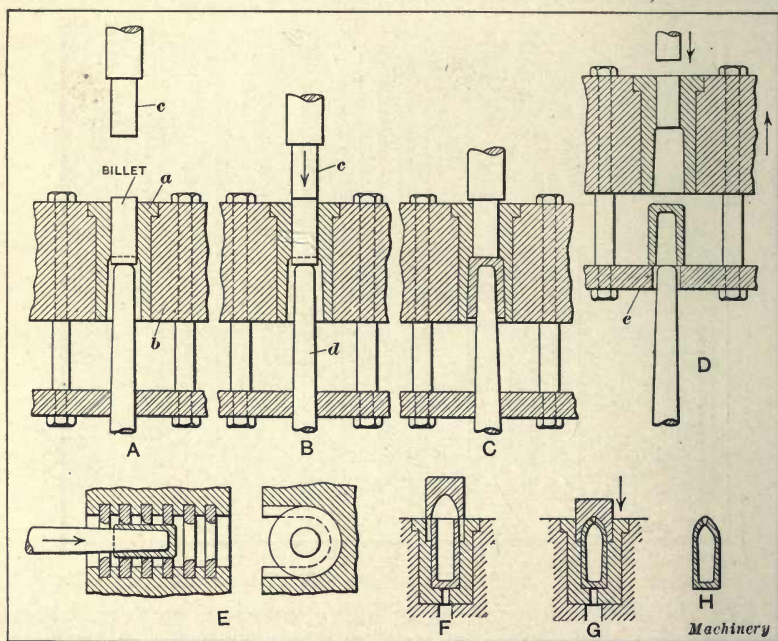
Method of Forging Large-caliber High-explosive Shells
